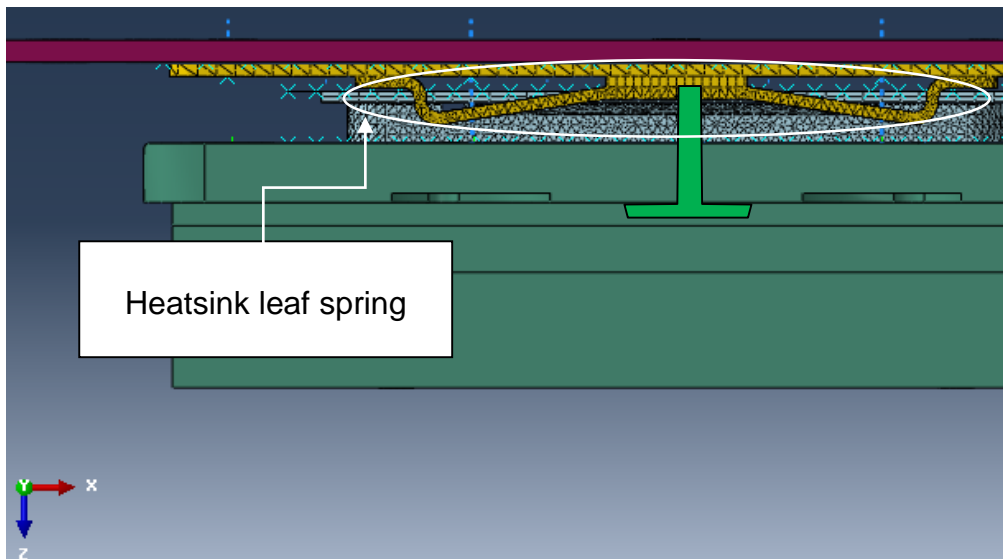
Heatsink Leaf Spring as Part of a Larger Assembly
